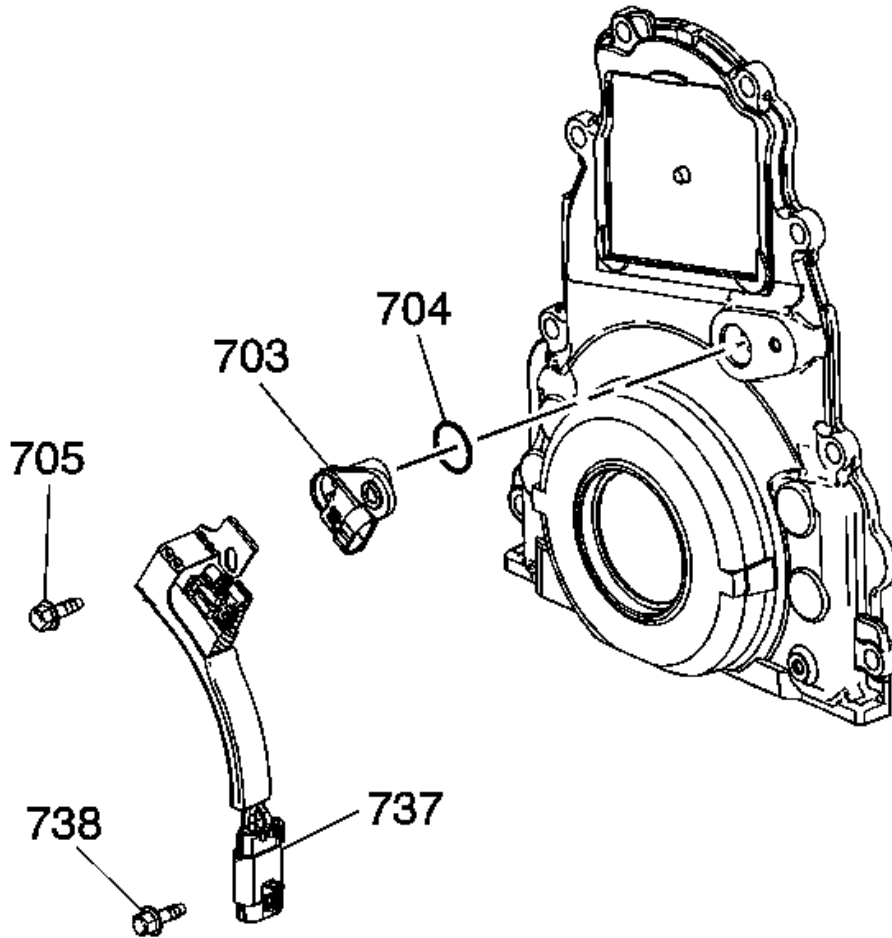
O-Ring Seal, Sensor, Wire Harness & Bolts
